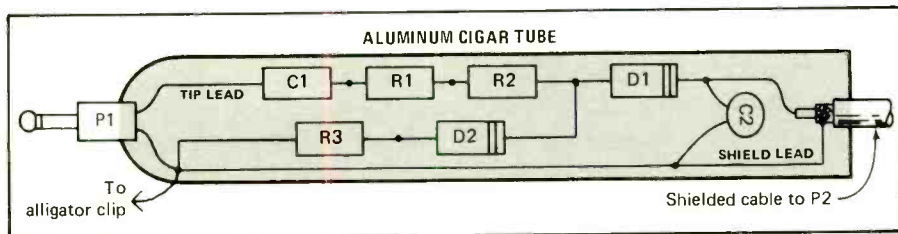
Construction details for probe portion of project. Note that all components are self-supporting and require no other mechanical elements during wiring. When installing circuit inside tube, do not remove paper or wood liner.
